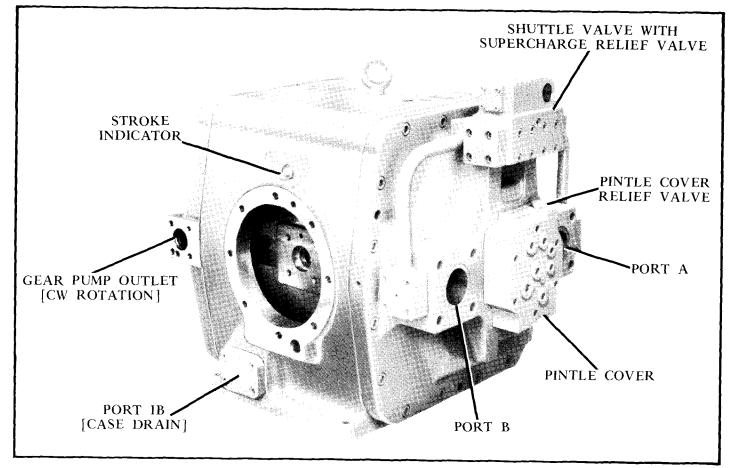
Type "DN" Pump w/gear Pump and Shuttle Valve With Supercharge Relief Valve. (55399R)
